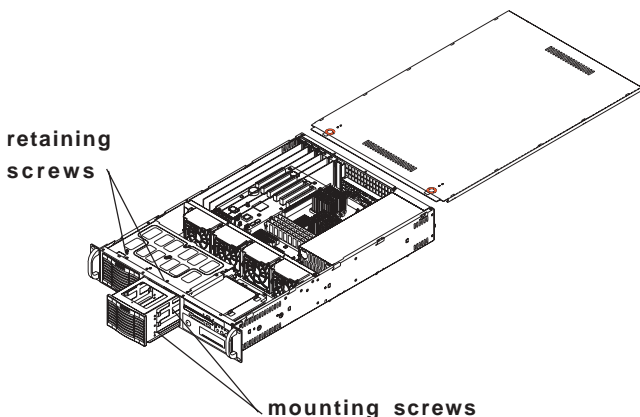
Mounting a IDE Drive in a Drive Bay
